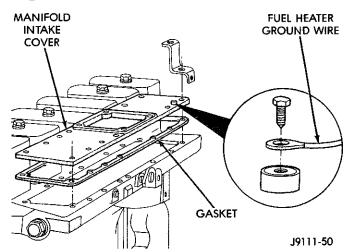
Manifold Intake Cover and Fuel Heater Ground Wire
